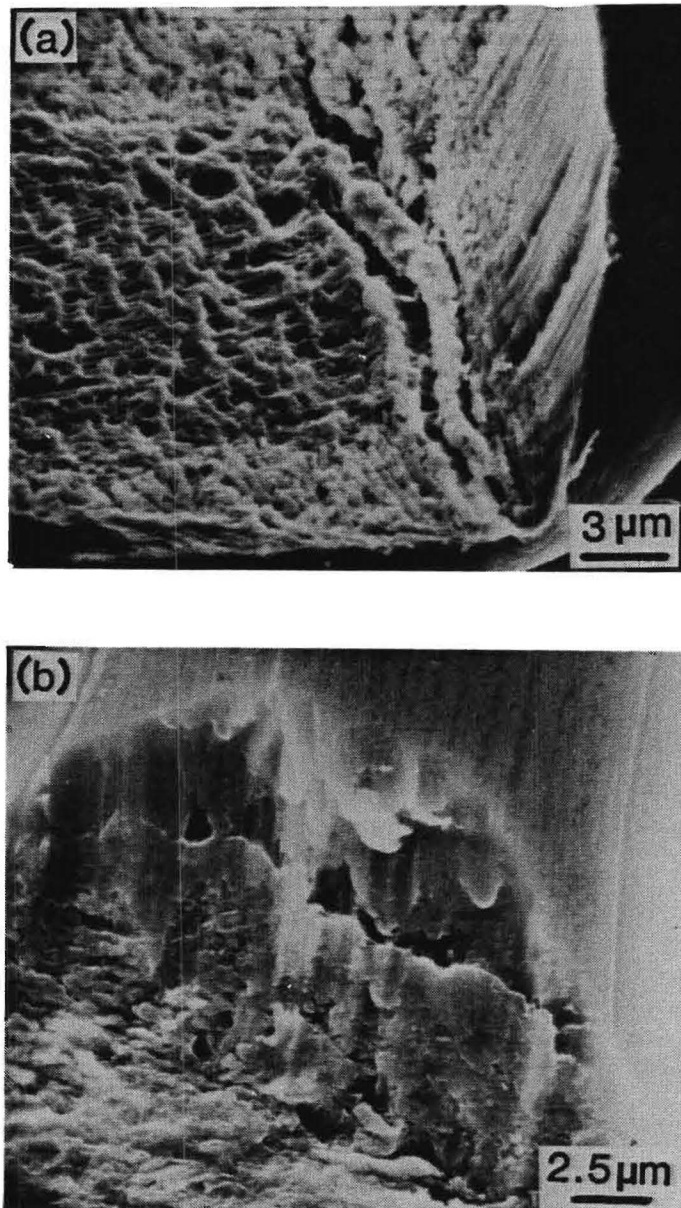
SEM fractographs of the aluminum bonded wire prior to fatigue with 100 mA showing
